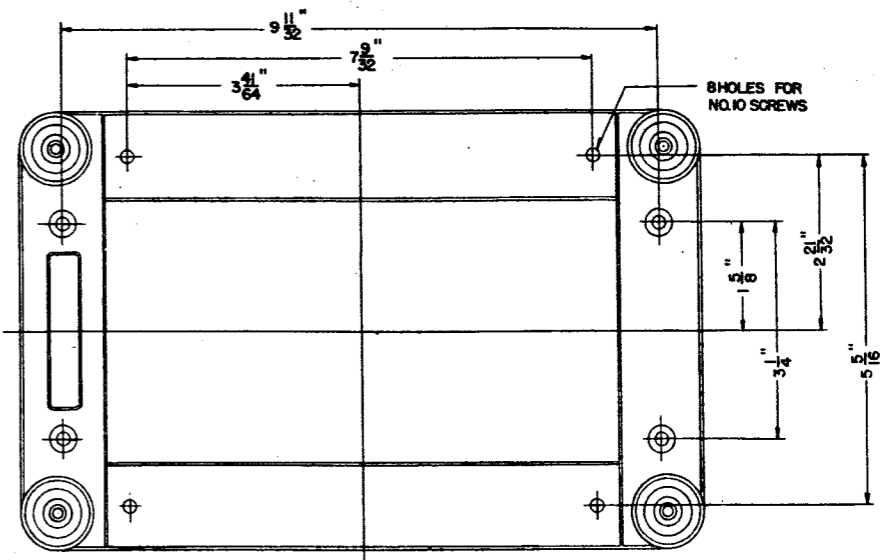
Outline Dimensional Drawing of Radio Receiver, Mount, and Rack
